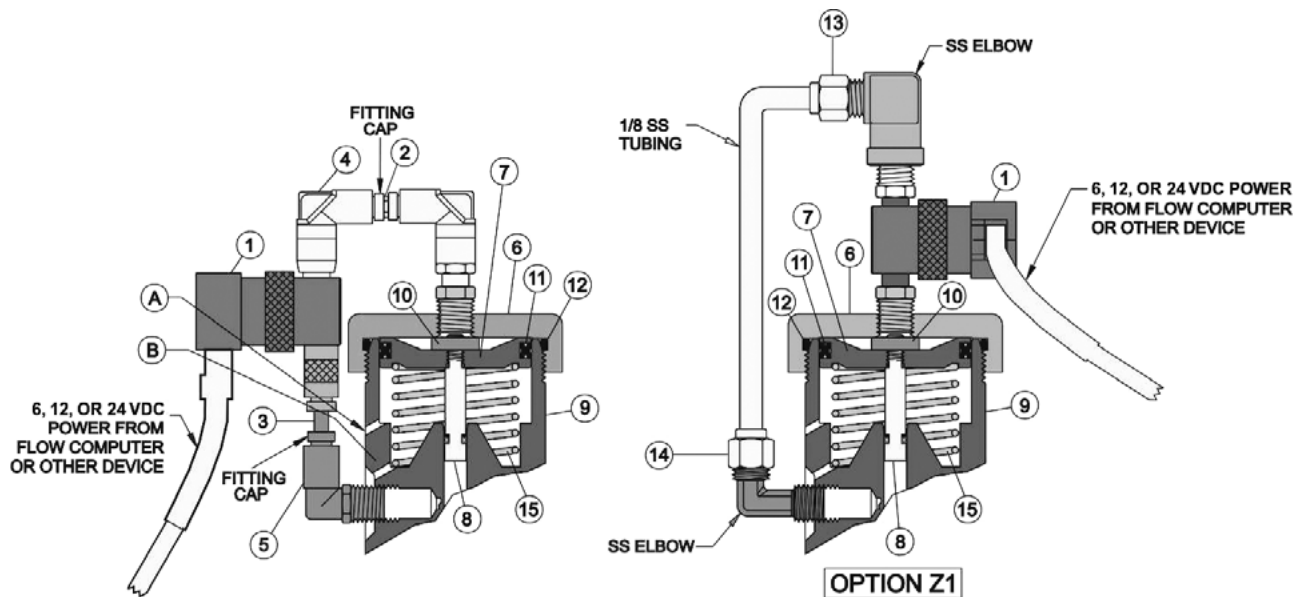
Inspection of Actuator and Pump Rod Seals or Stroke Adjustment Nut
